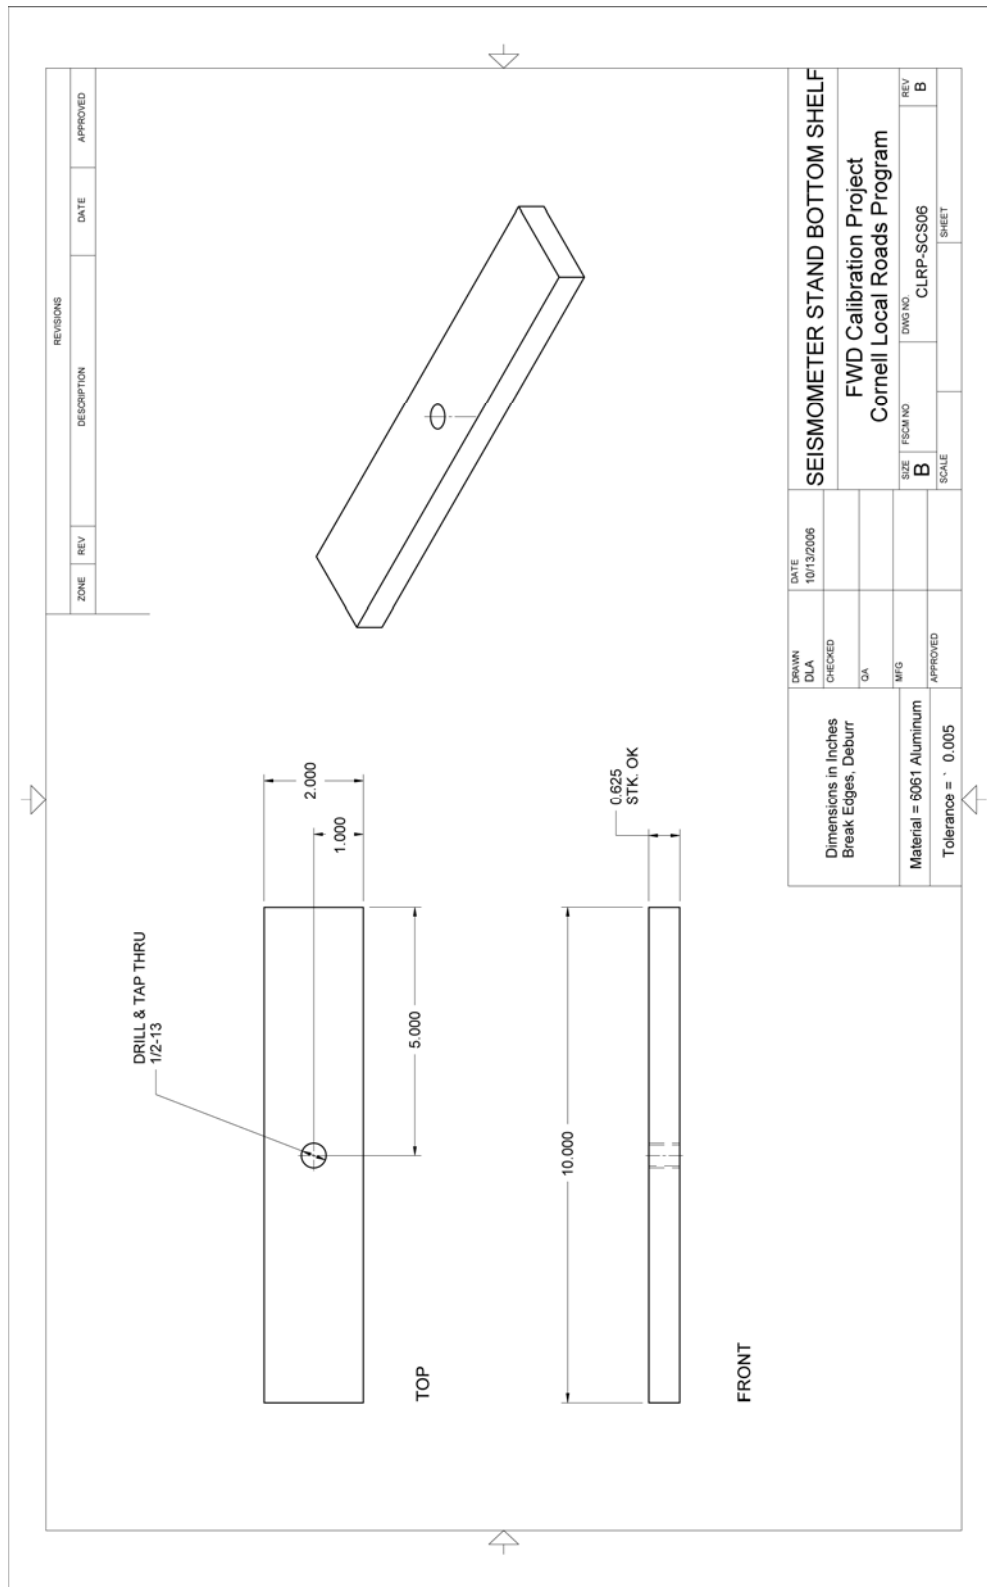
Drawing. CLRP-SCS06 Seismometer Stand Bottom Shelf.
